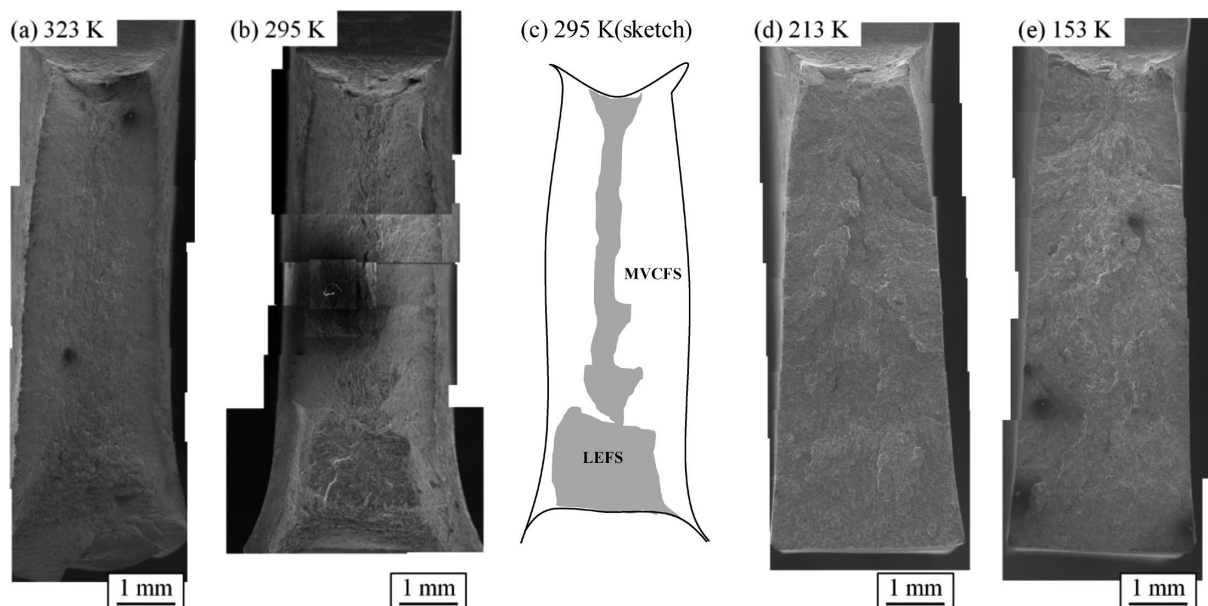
Fracture appearance of sub-size Charpy impact specimens tested at (a) 323, (b) 295, (d) 213, and (e) 153 K. Sketch of the fracture surface (c) is illustrated in photograph (b). MVCFS (white layer): microvoid coalescence fracture surface and LEFS (gray layer): low energy fracture surface.
